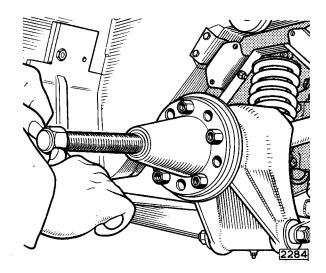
Removing the rear hub with the extractor (Churchill Tool No. JD. 1 C)
